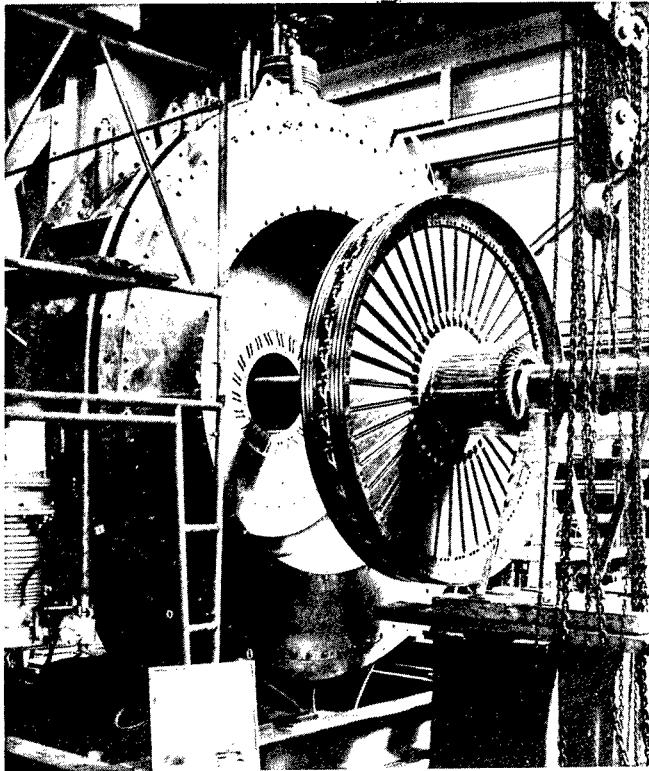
MOTOR ASSEMBLY - INSERTION OF ROTOR
